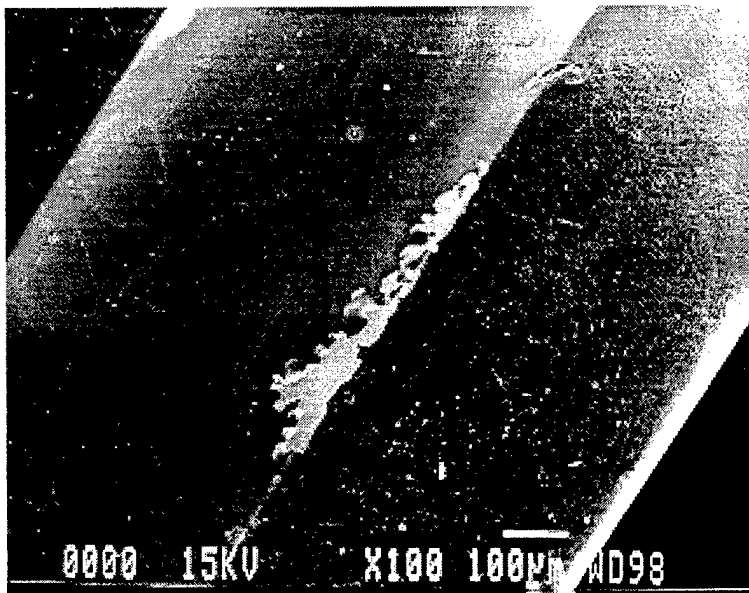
View of Inner Race With Damaged DLC Coating, 100x Mag.
